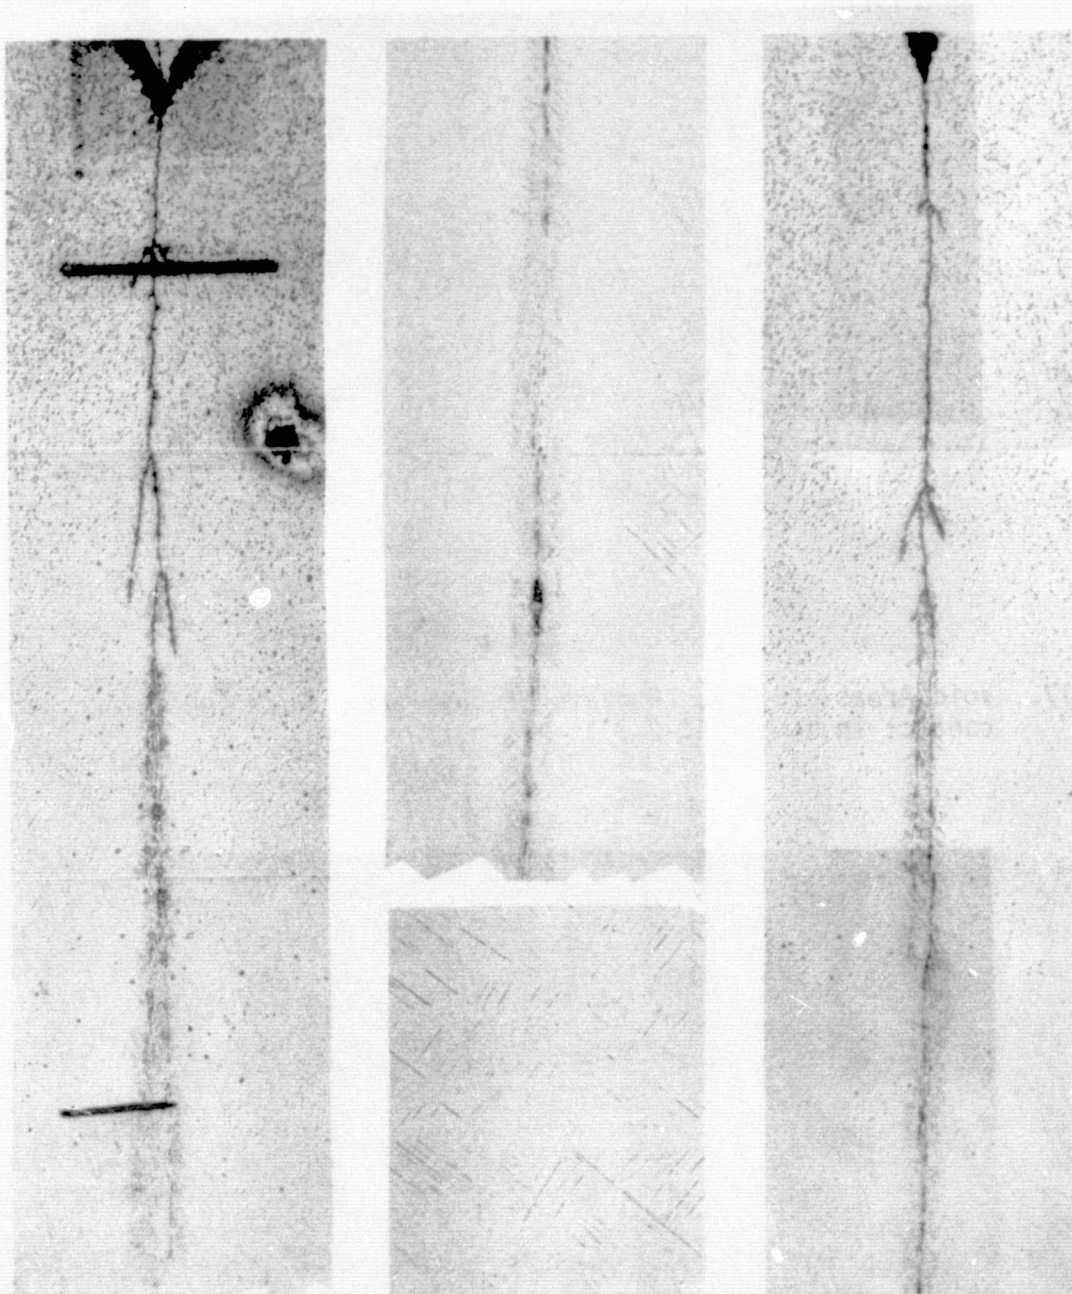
Composite Picture of Primed Specimen at 15X. (Composite picture similar to Figure 15 in the primed sample. The voids extend further into the weld in this sample.)
